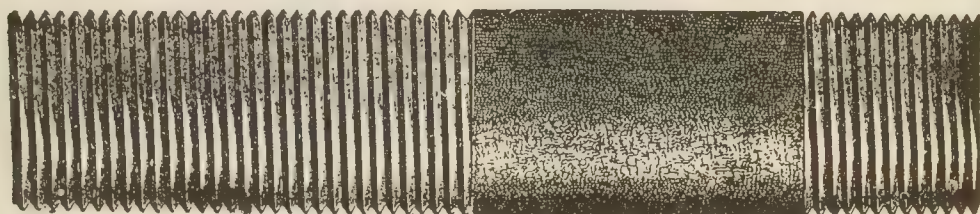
,693.—Tank nipple, 6 ins. long over all. Tank nipples have an American Briggs standard lock nut thread 4 ins. long on one end, and a standard pipe thread on the other end. Regularly made in sizes $\frac{1}{4}$ in. to 3 ins.
